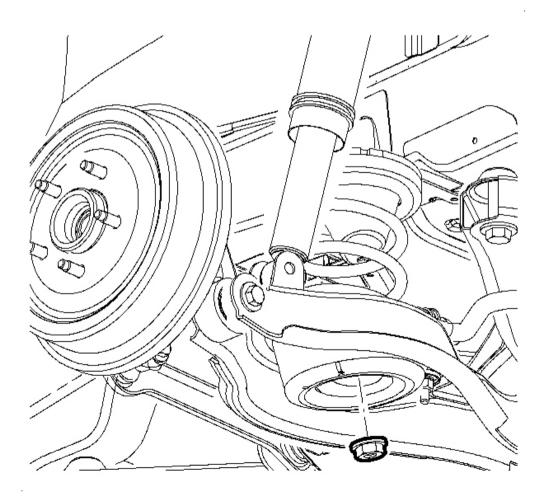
Jounce Bumper Nut & Lower Control Arm
